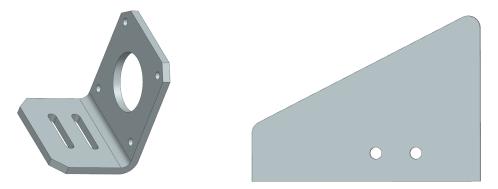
Attachment piece for motor Figure 5.8: Extra piece for attachment of motor
